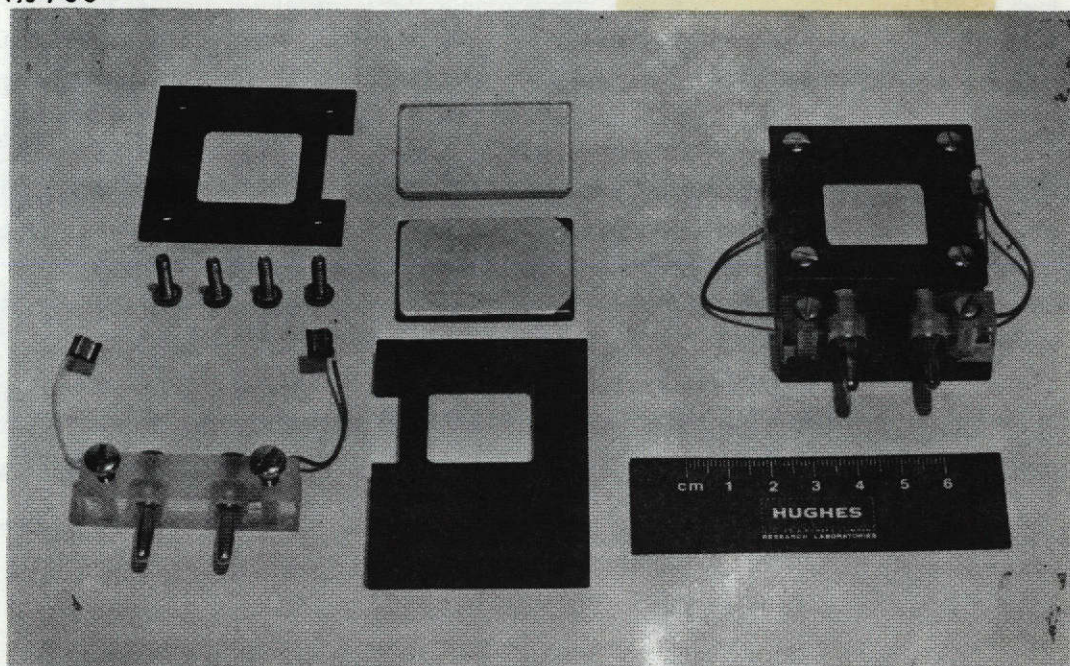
Exploded View of dc Photoactivated Liquid Crystal Light Valve Device.
